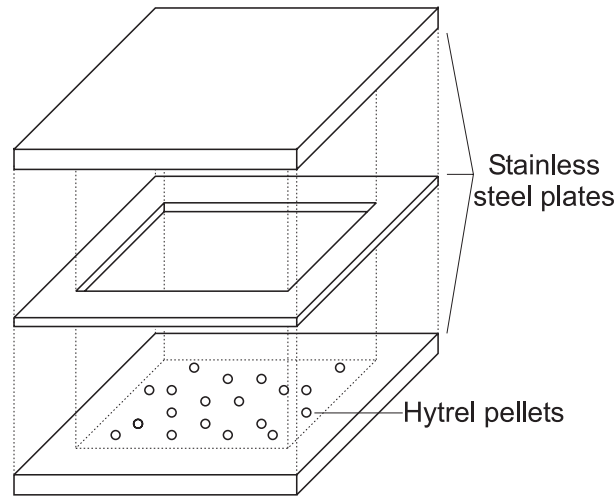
Compression-moulding picture-frame arrangement used to produce Hytrel sheet material.
